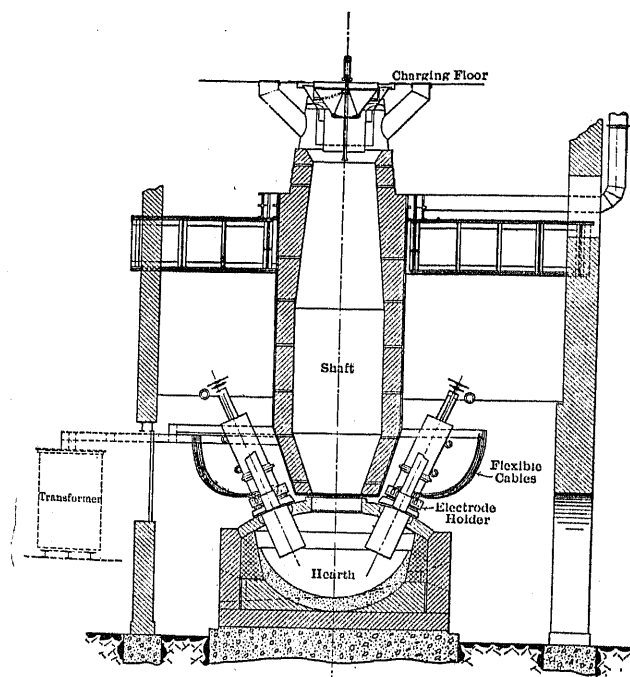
SHAFT TYPE, ELECTRIC SMELTING FURNACE FOR PIG IRON
